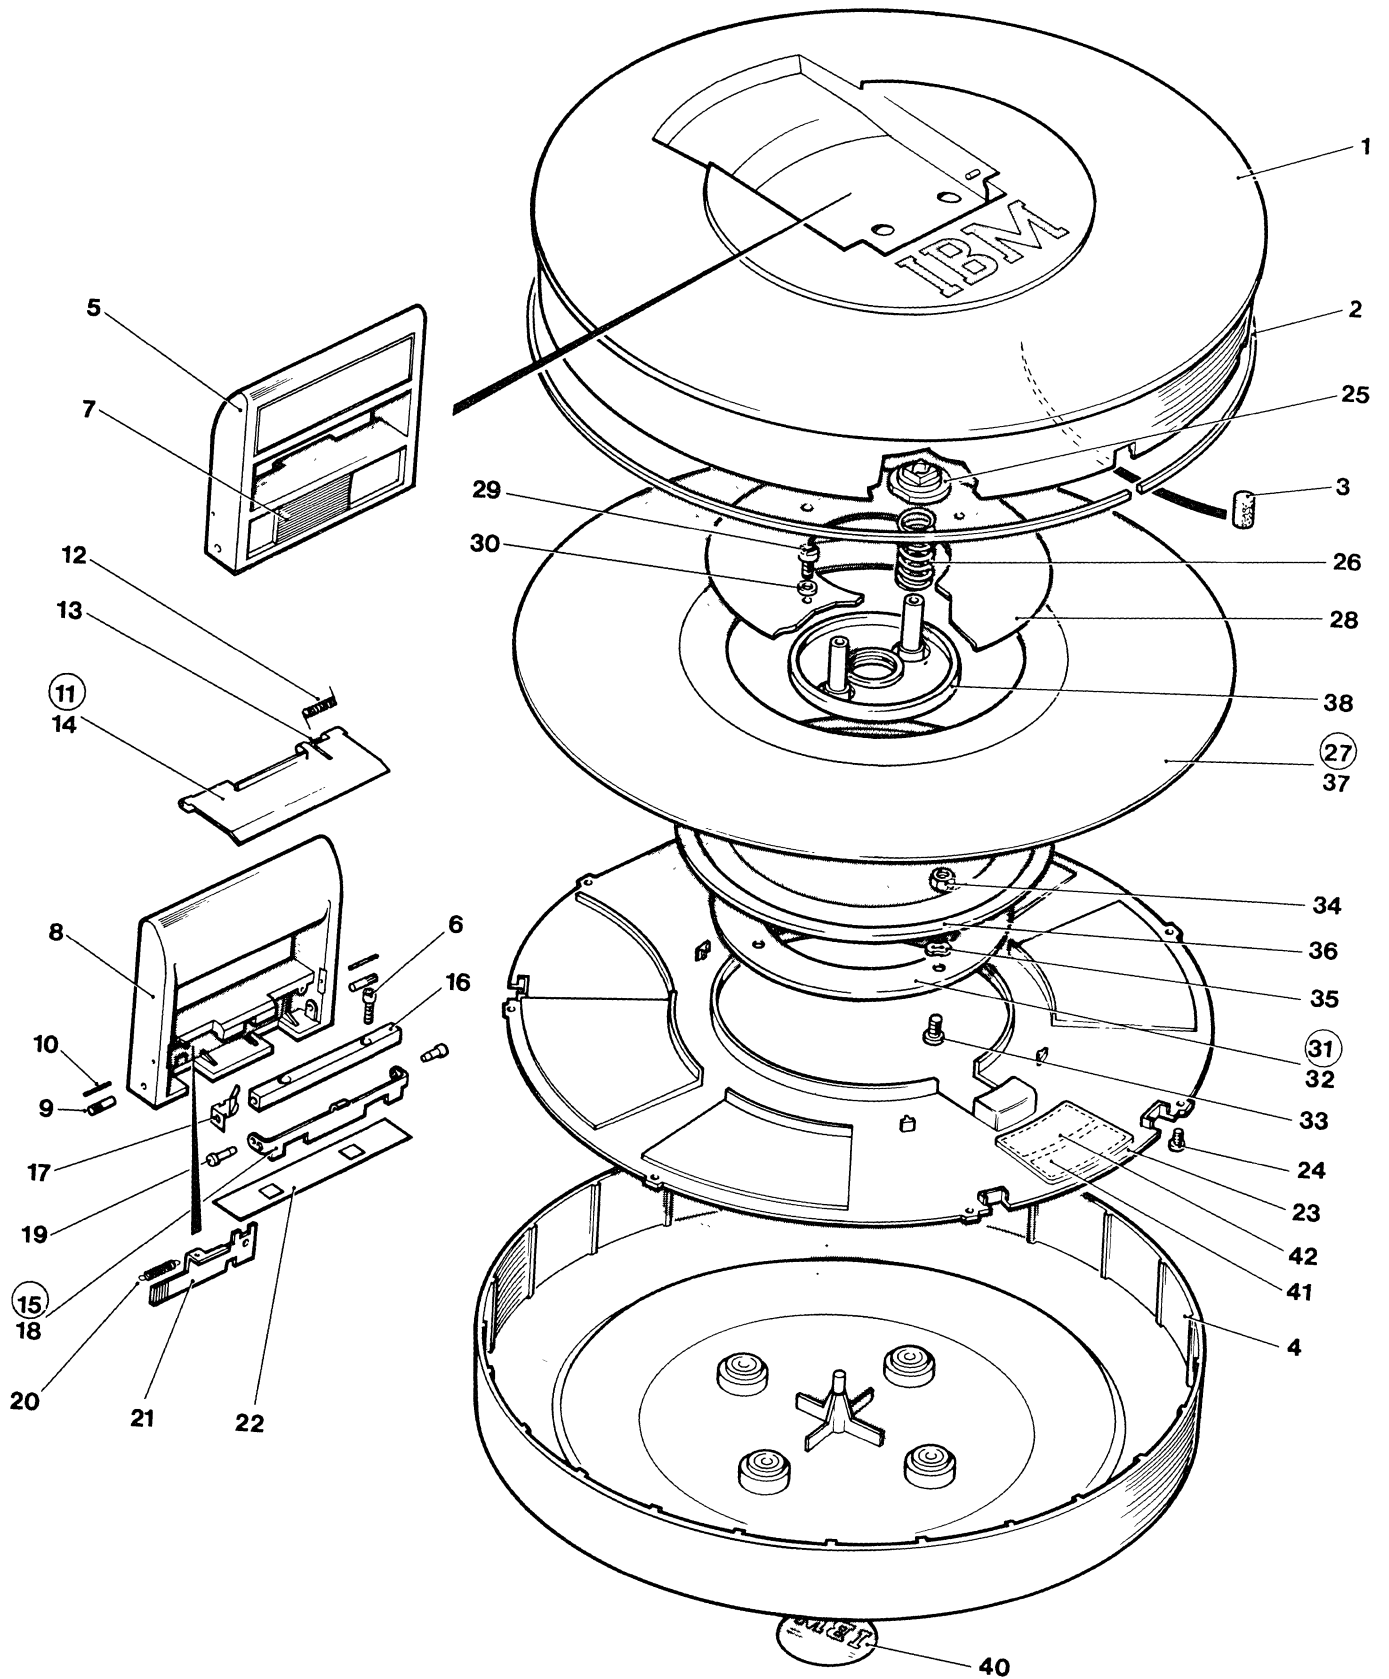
5440 CARTRIDGE ASSEMBLY
